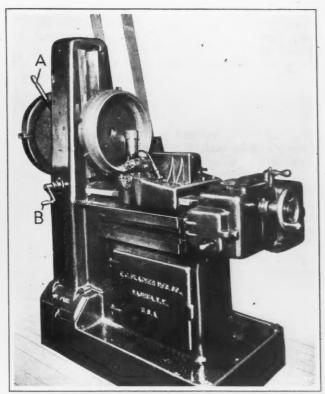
Set-up of Gear-cutting Machine for milling Needle Slots in Cylinder Forgings
